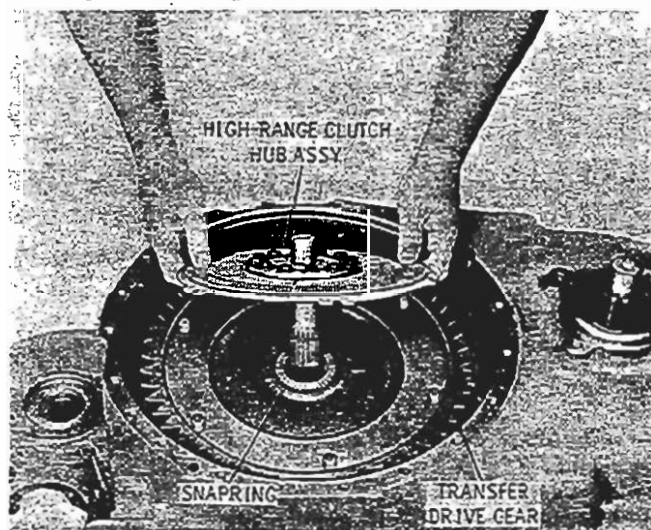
REMOVING HIGH-RANGE CLUTCH HUB ASSEMBLY
